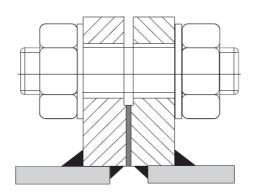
NARROW FACE JOINT USING RAISED FACE TYPE FLANGES – STEEL SHOWN
